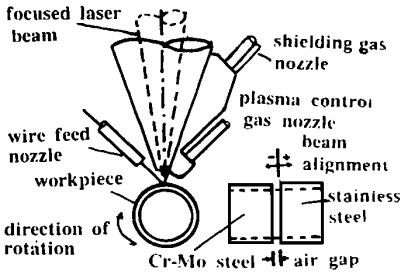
The schematic diagram of experimental apparatus of laser wire-filler welding
